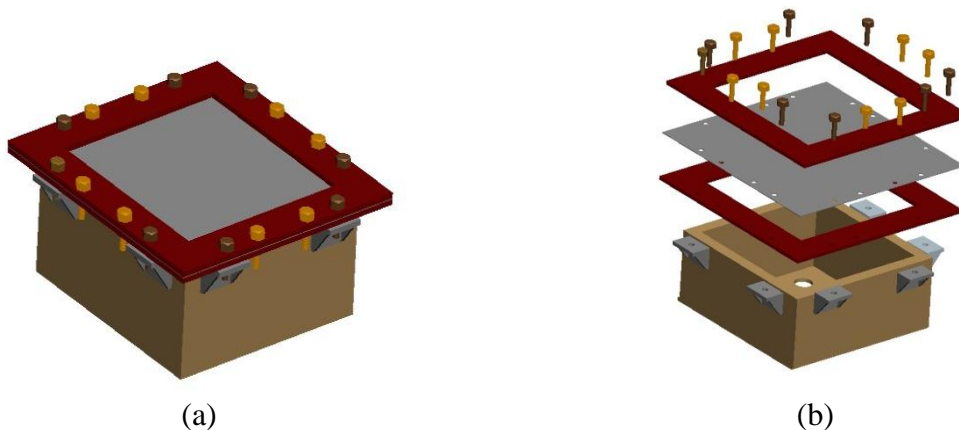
(a) Assembled and (b) exploded view of the setup in CAD modeling
